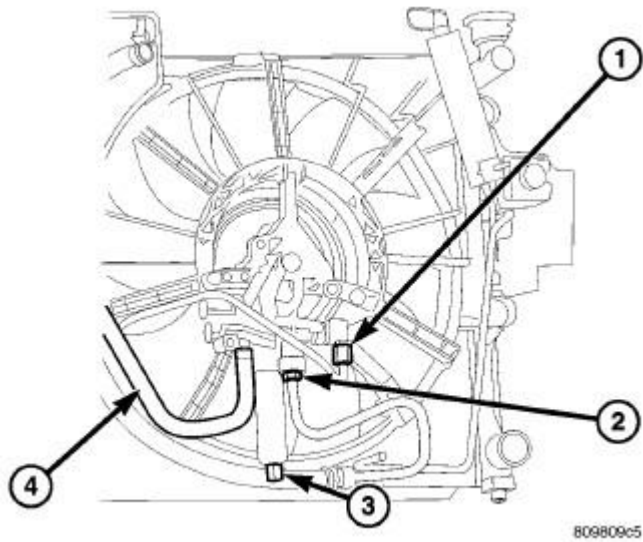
HYDRAULIC LINES/HOSES AND ELECTRICAL CONNECTOR
